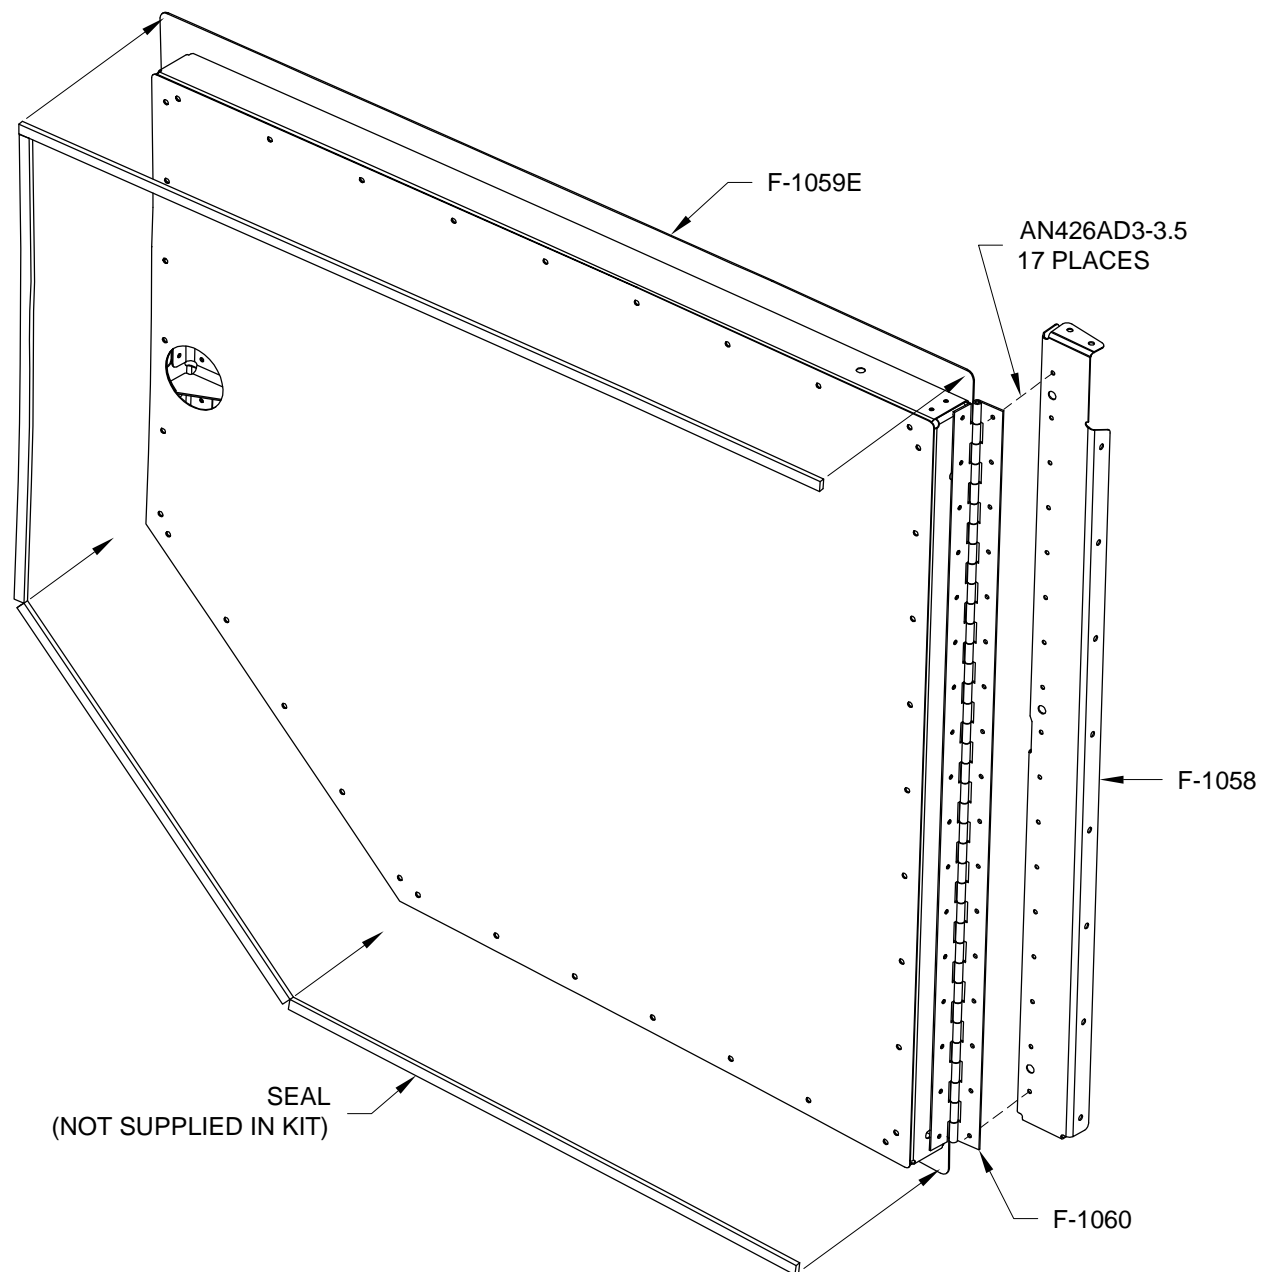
ATTACHING THE HINGE FRAME AND SEAL
